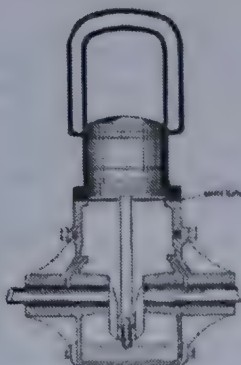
Showing How a Baffle Plate Can Be Fitted in Lower End of Cylinder to prevent an excessive amount of oil getting in the combustion chamber.
